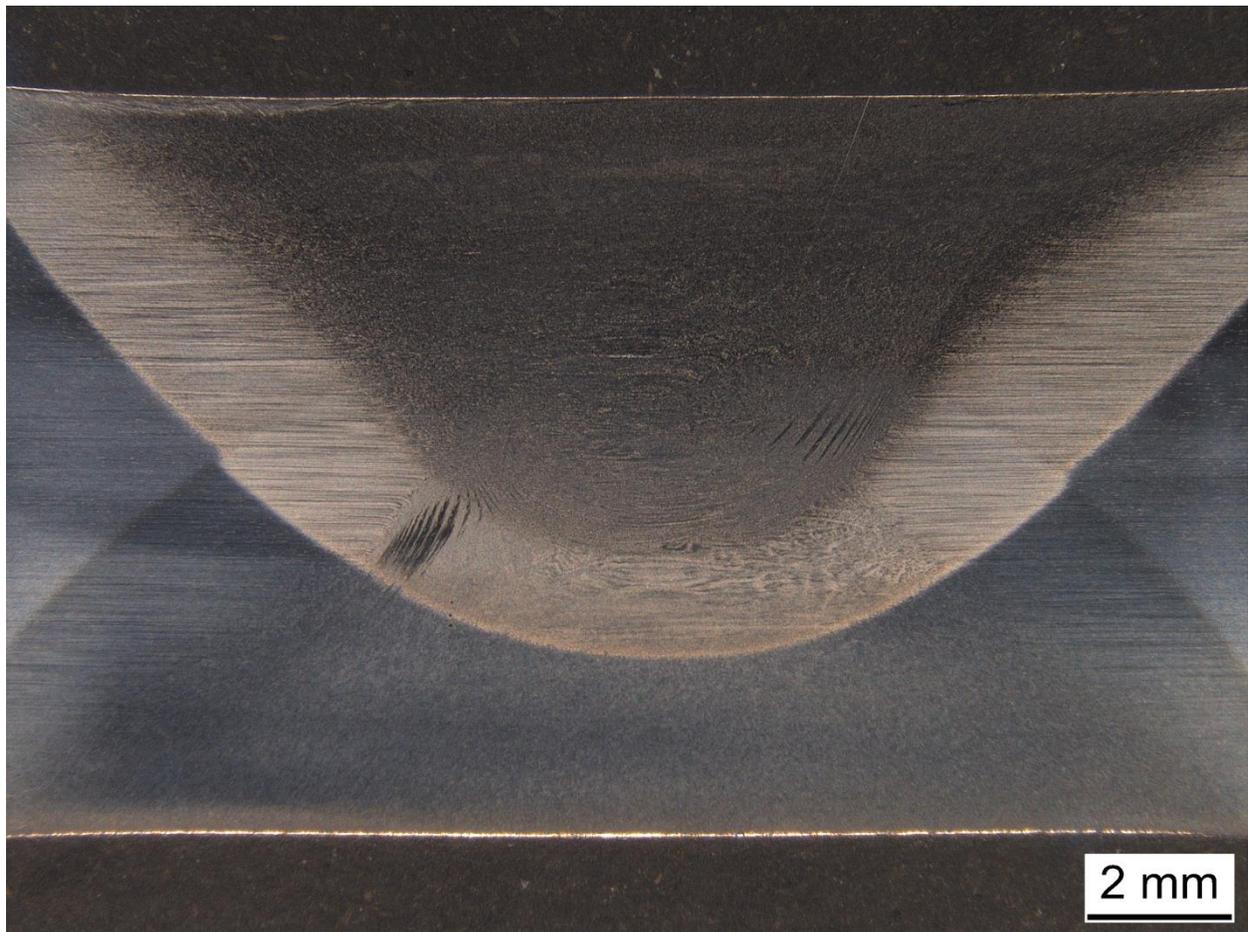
Cross sectional view of a double pass bead on plate weld. The 1st pass weld is the darker bowl shape at the bottom of the image, and the 2nd pass is the more colorful bowl shape on the top of the image.
